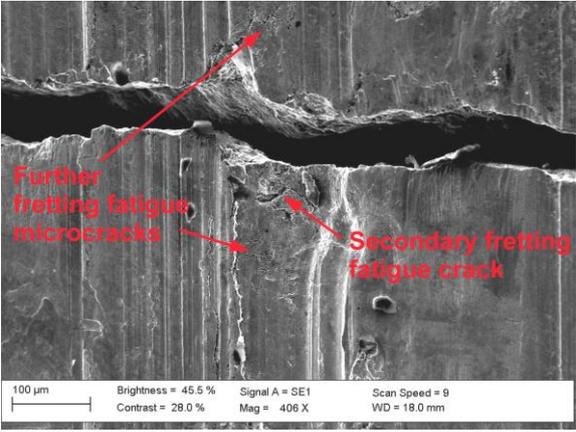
Main fatigue crack under press fit with secondary crack and further fretting fatigue microcracks
